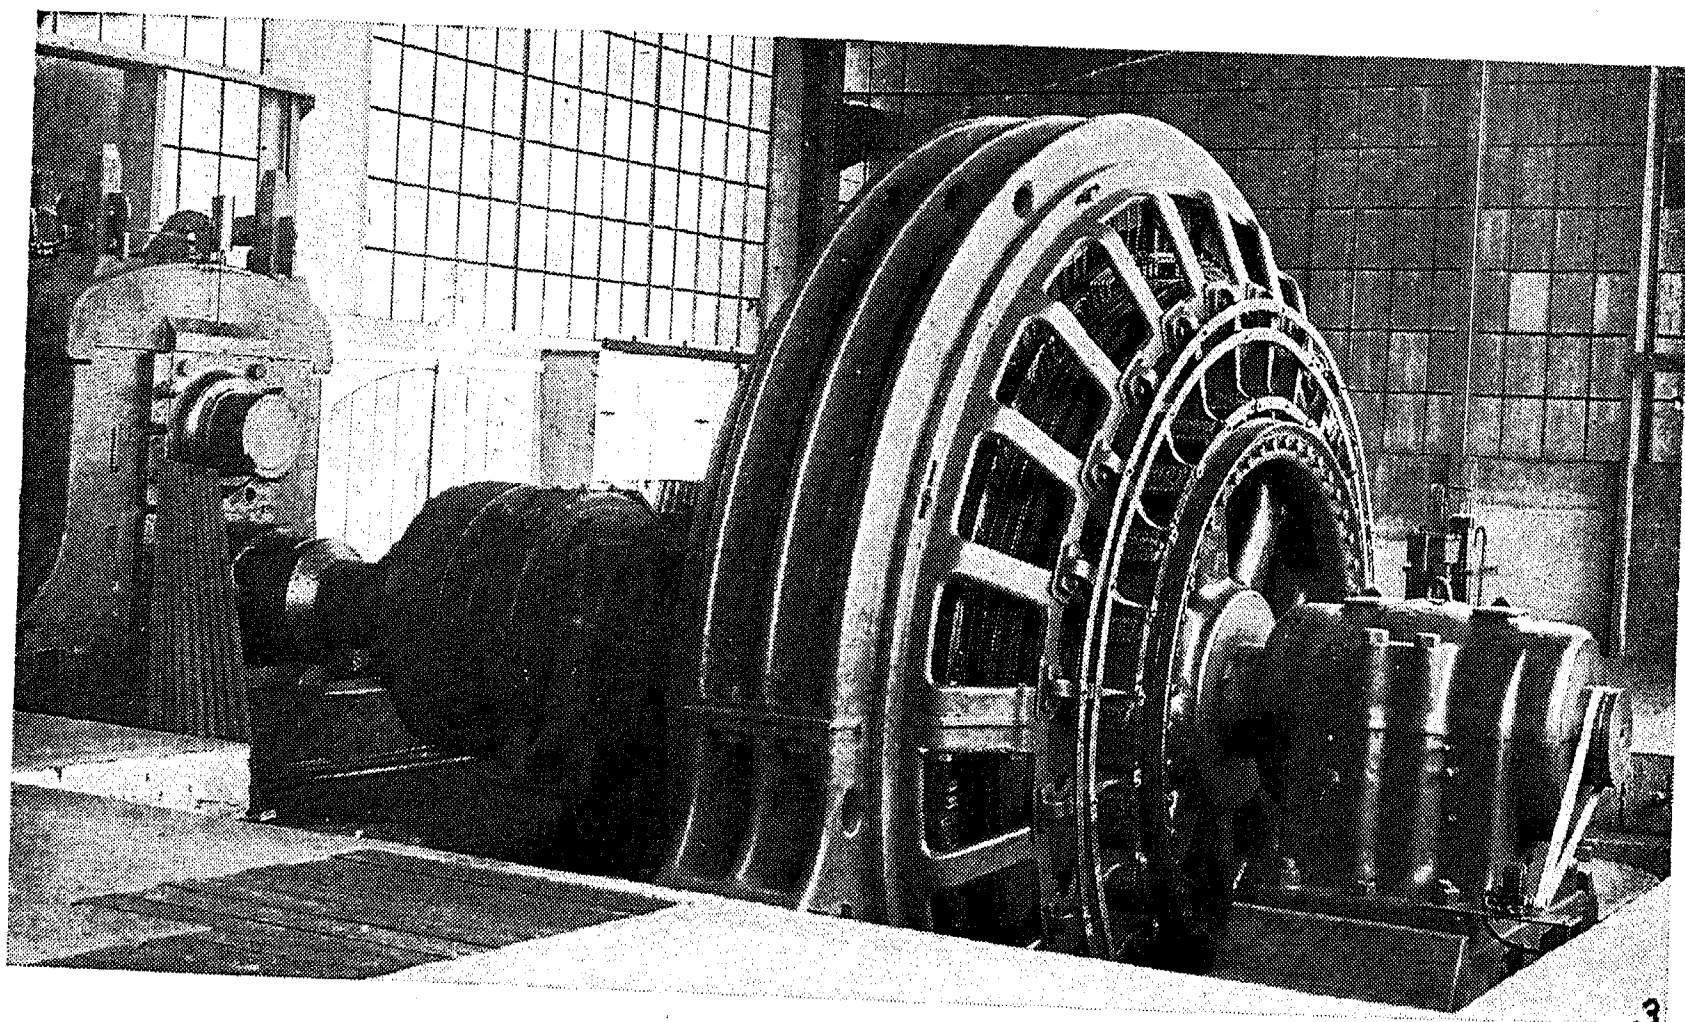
REVERSING MOTOR DRIVING BLOOMING MILL OF CENTRAL STEEL COMPANY [SYKES]
